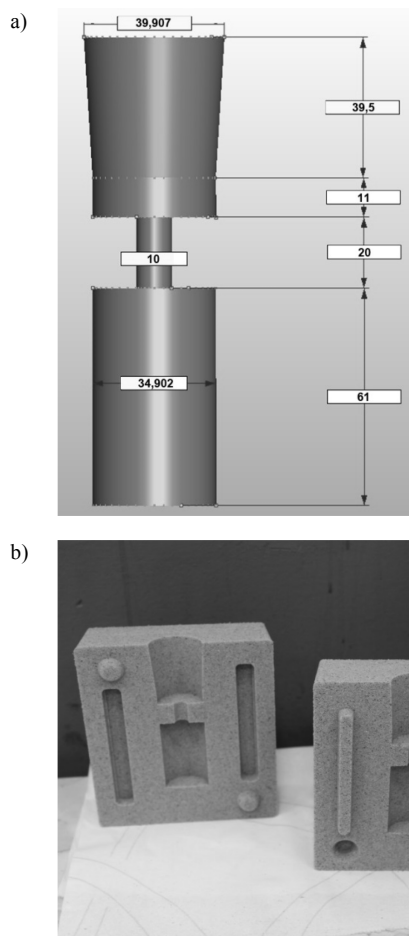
The shape and dimensions of the experimental casting (a) and Sanduhr probe mold (b)
